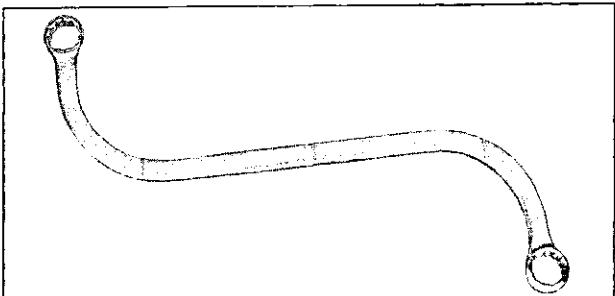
Front Door Hinge Tool J-22729 (9/16" Box) - "B, C & E" Styles
